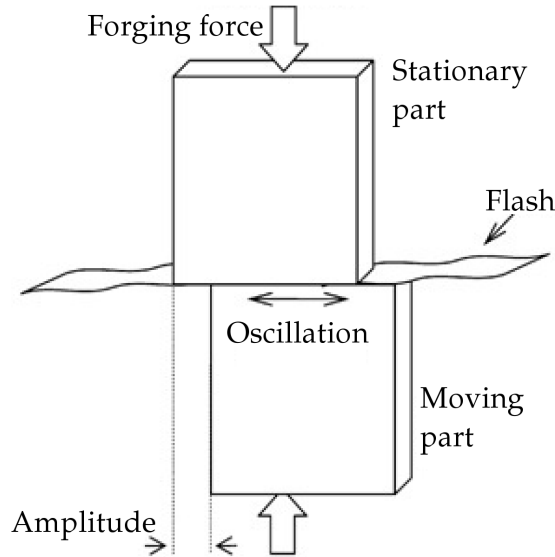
Linear friction welding (image from TWI Ltd.)
